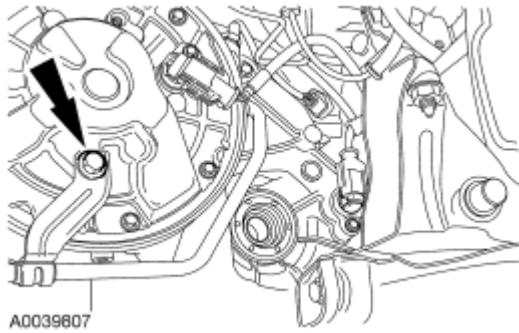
Locating Transmission Fluid Cooler Line Bracket & Bolt
